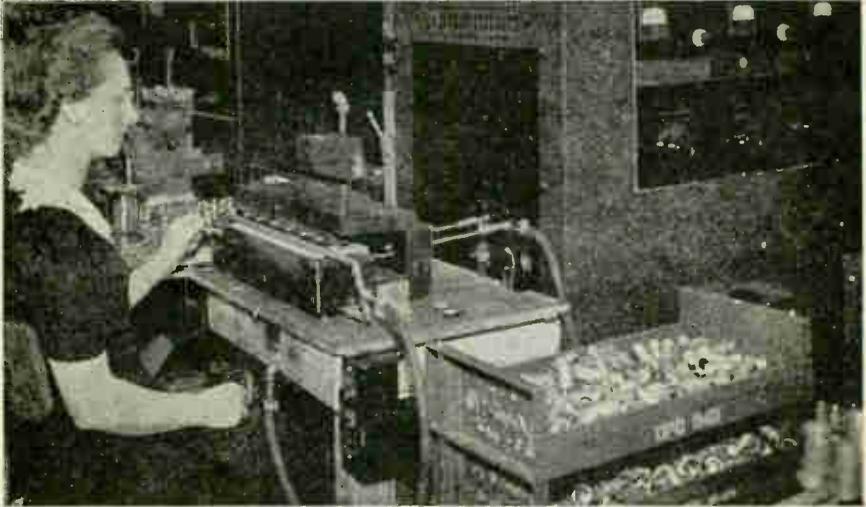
A 5,000-watt oscillator being used for soldering crystal shells,
